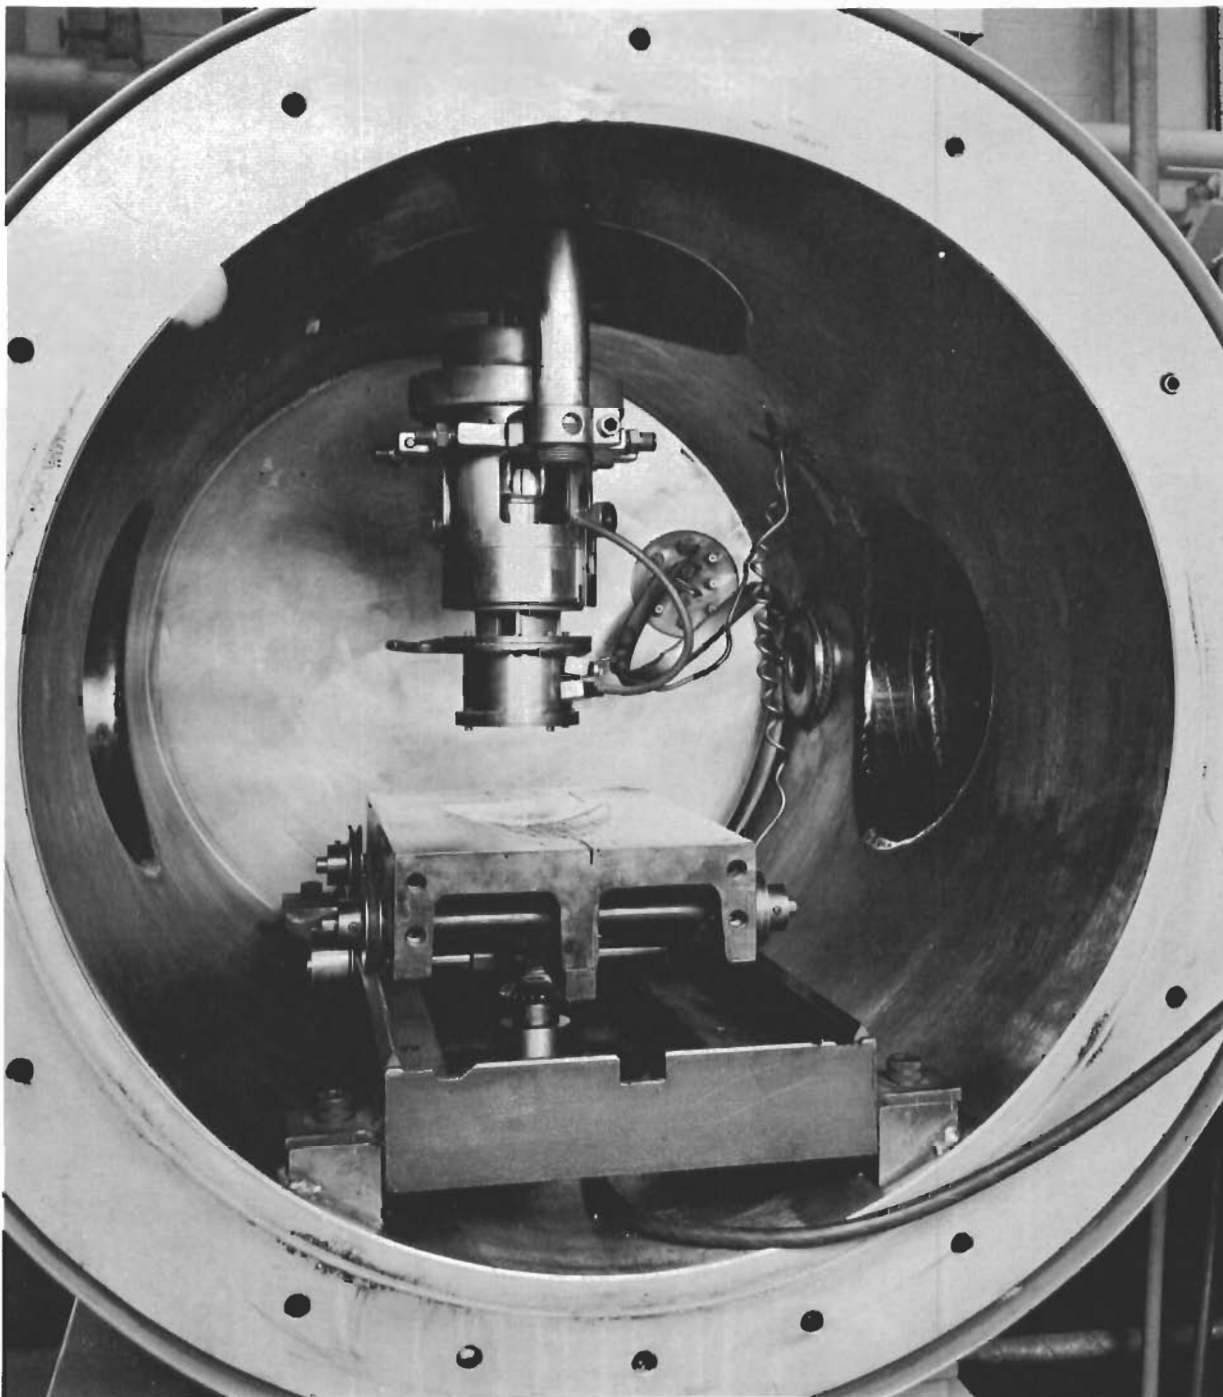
Work Chamber of Electron Beam Welder Showing Gun and Work Table
